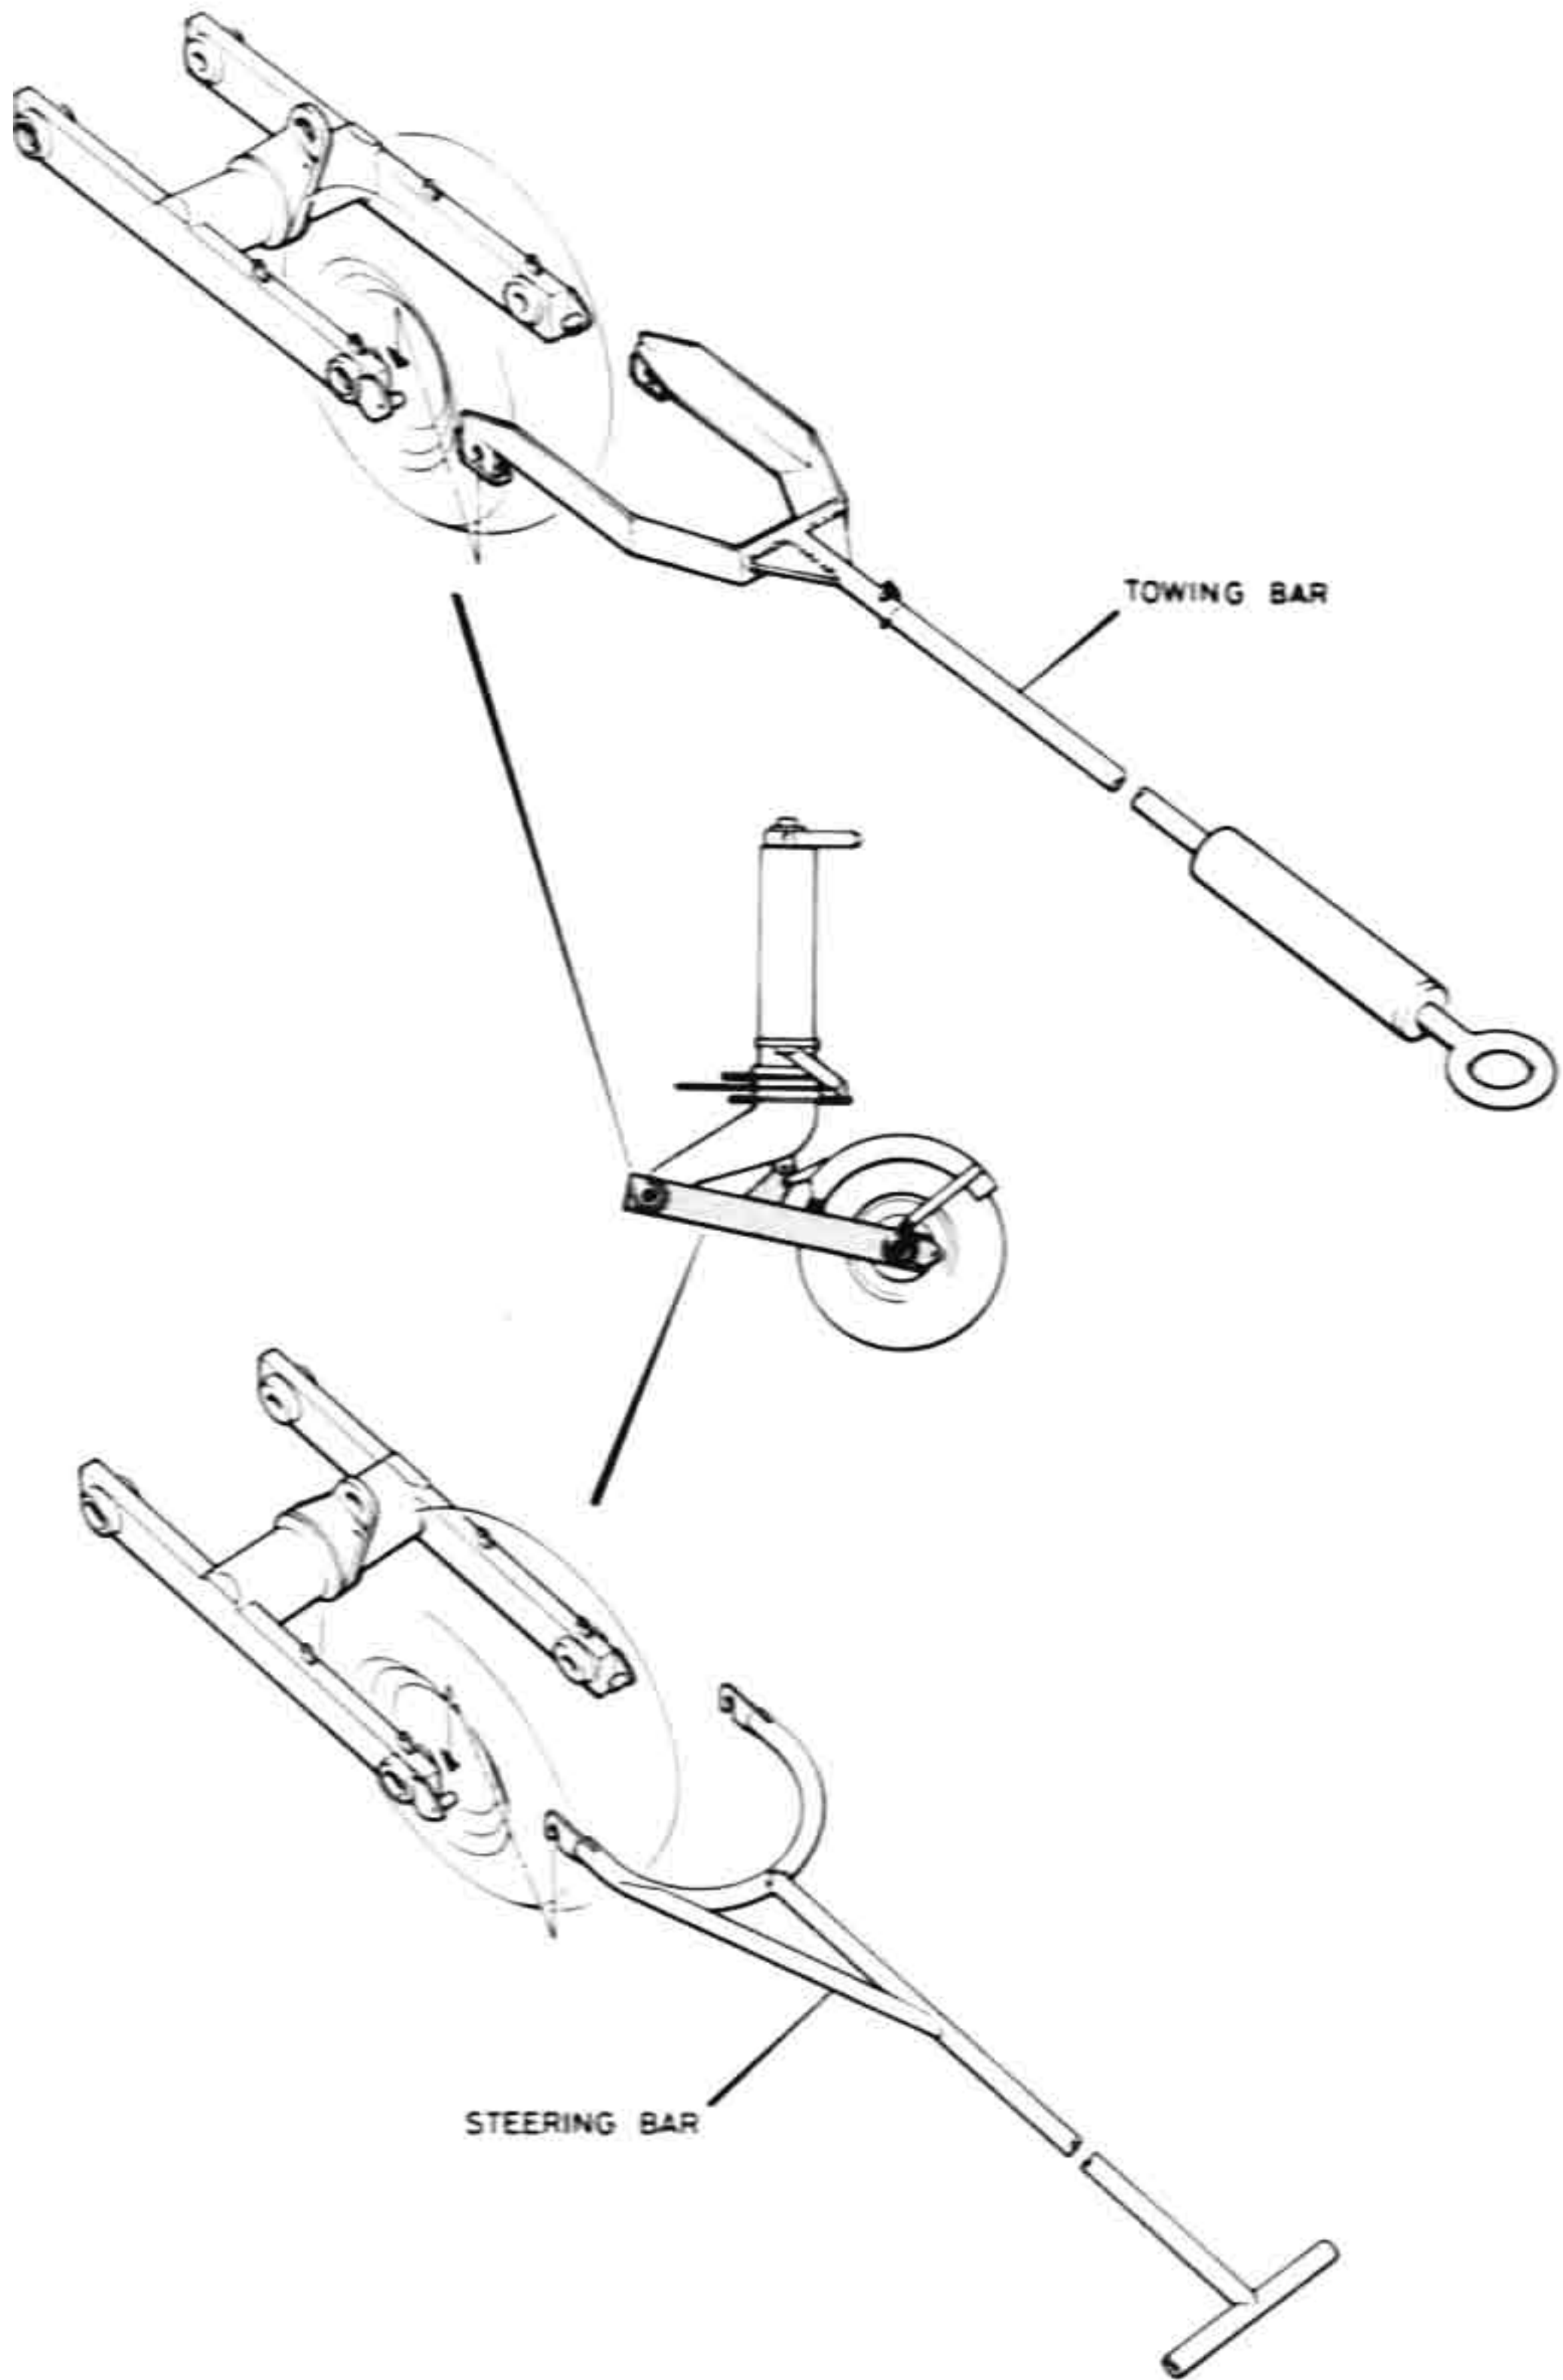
TOWING AND STEERING ATTACHMENTS
